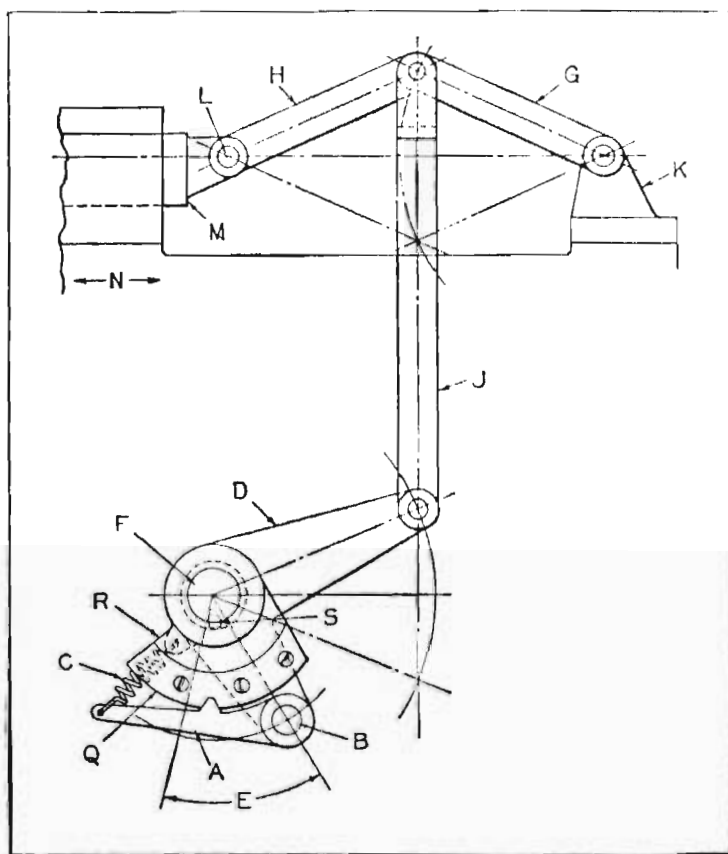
Split-drive Mechanism by Means of which Oscillating Bellcrank D Transmits Reciprocating Movement to Slide M with Provision for Disengaging the Drive from Shaft F in Case Slide M Becomes Jammed.
